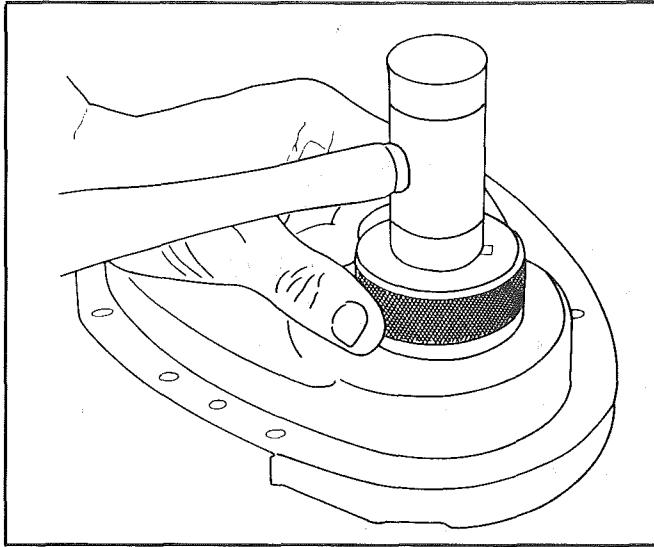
A3-28 Installing Oil Seal-Cover Removed
